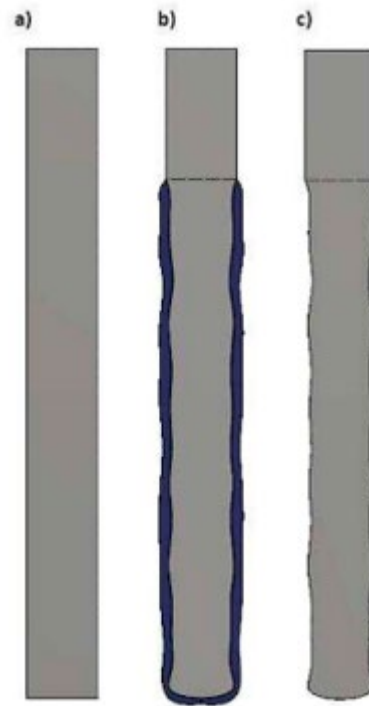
Schematic cross section view of agitated soldering samples. a) showing unaffected sample, b) worn sample with aluminum residue and c) worn sample with loss of steel due to soldering.
